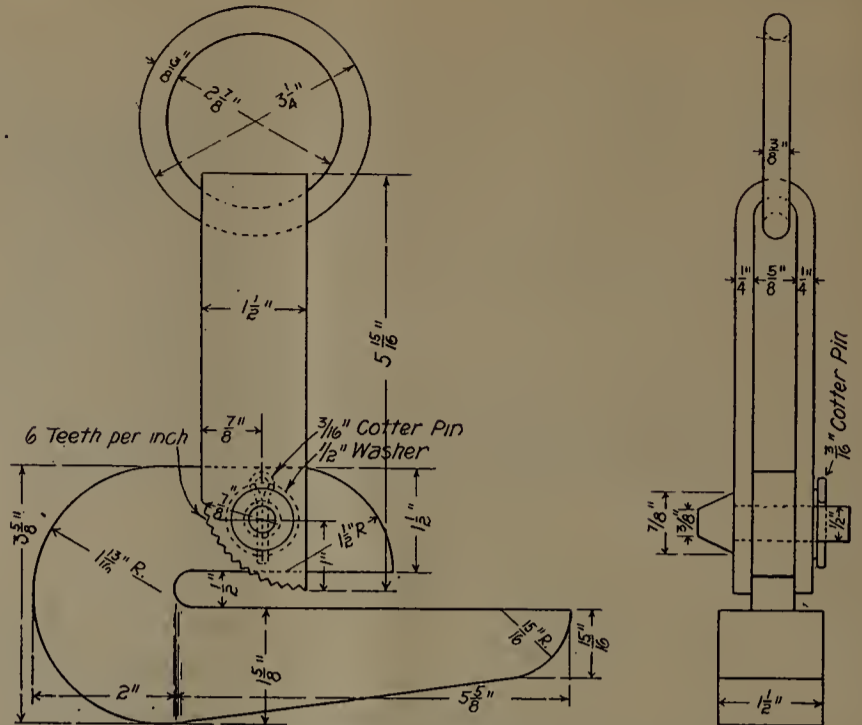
Boiler Sheet Clamp, Beech Grove Shops.
